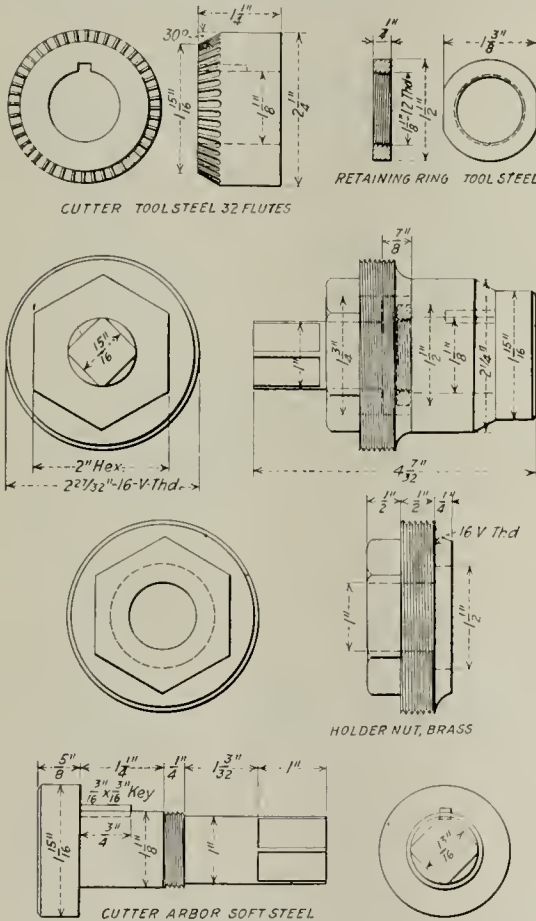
Reseating Tool for Throttle Ram Seat for Chicago Lifting Injector
